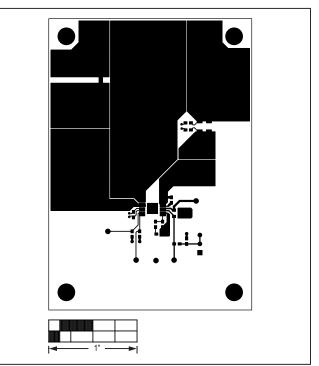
MAX20051 EV Kit PCB Layout —Component Side
